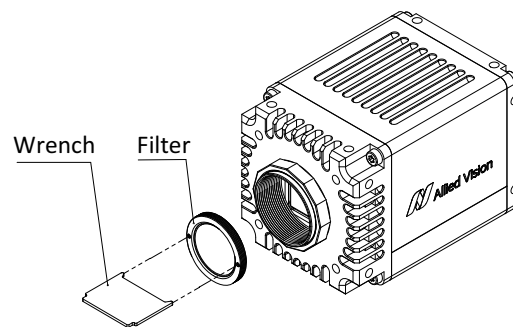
Goldeye Pro G5 camera with C-Mount, filter, and locking wrench
